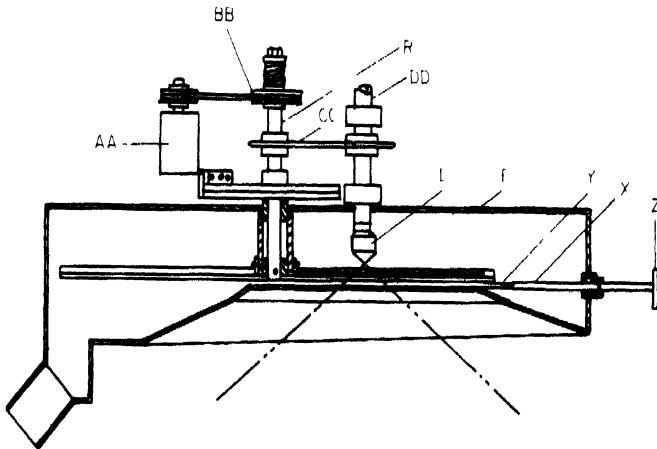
Water trough assembly. X, Shaft; Y, Shutter; Z, Handle; AA, Disc drive motor; BB, Variable speed pulley; CC, Chain drive; DD, Rotating nozzle pipe
